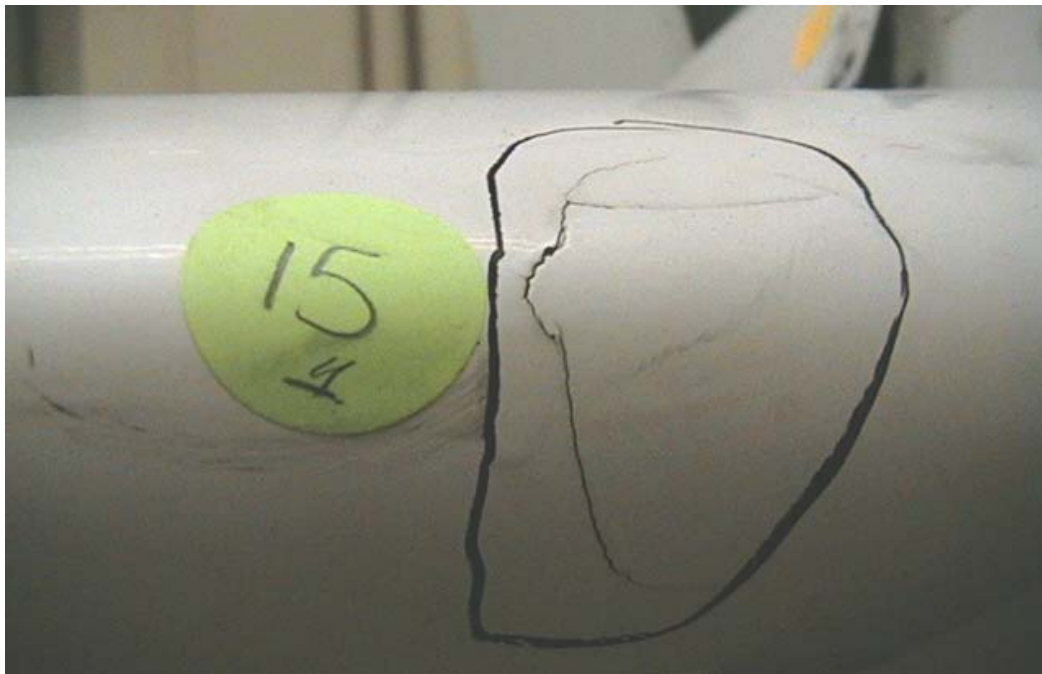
Leading-Edge Crack on the Cessna 402A Horizontal Stabilizer
